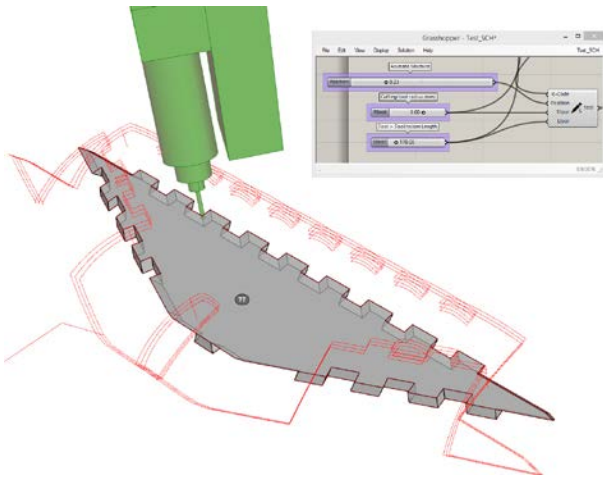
Integrated Machine Simulation to check for collision points (Tool path display in this figure is without tool length offset G-Code function G49). [4]
